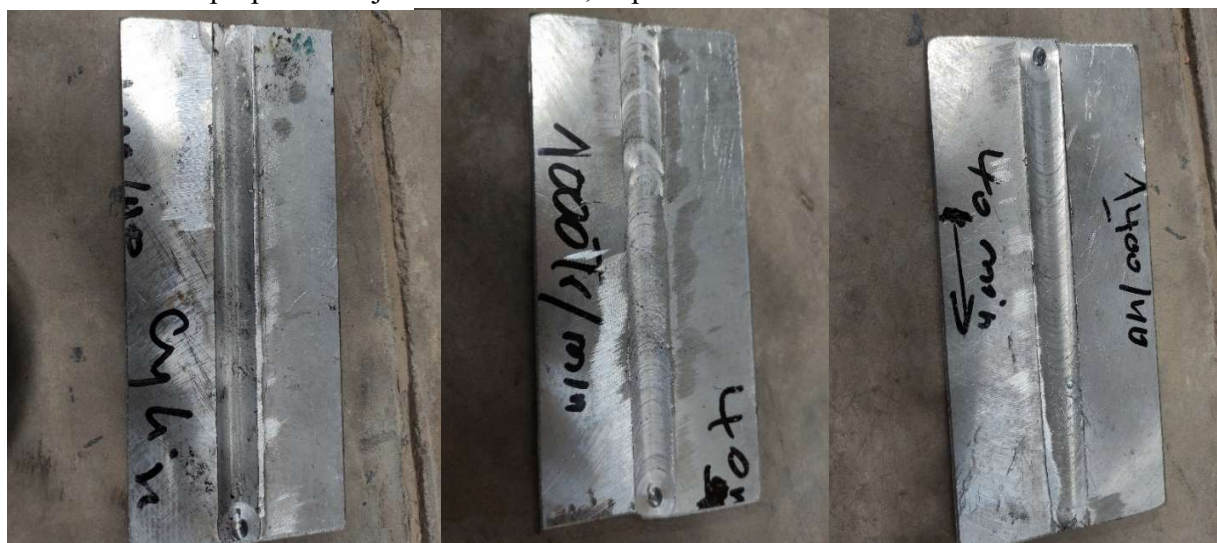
Friction stir welded specimens of different tool rotational speeds.
